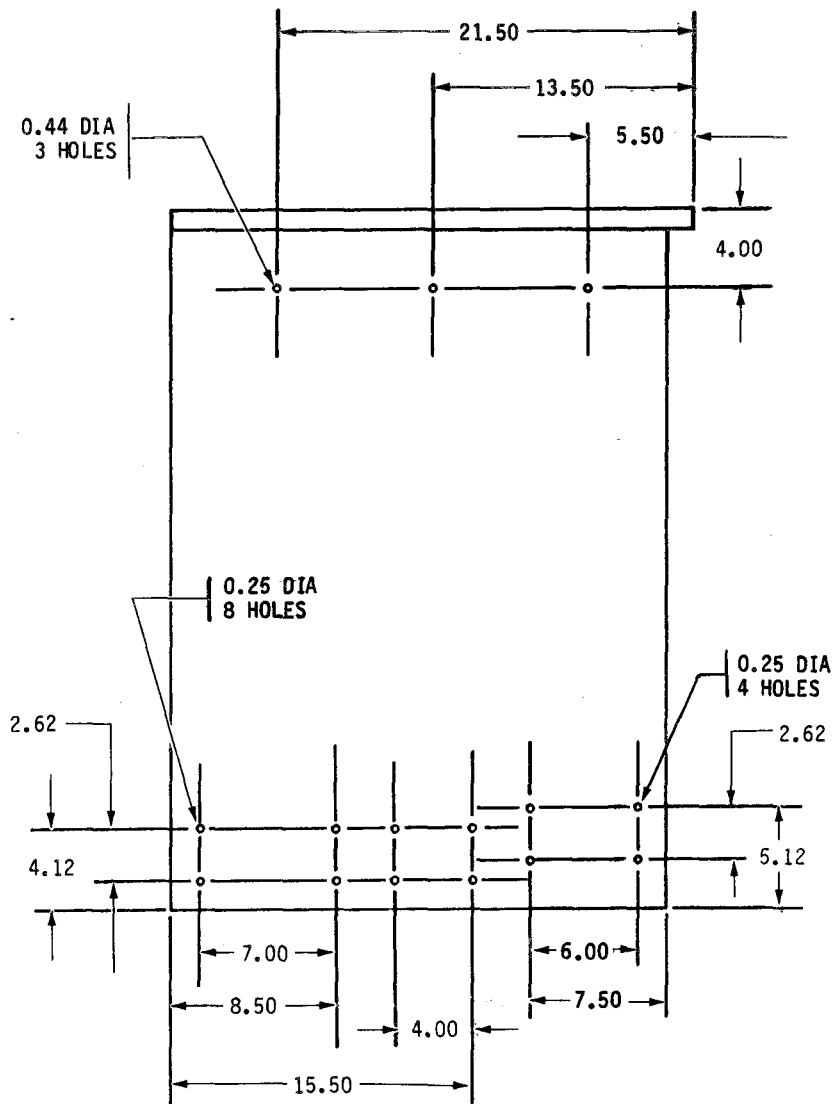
Hole dimensions for floor mounted equipment, unit 2, M35A2.
